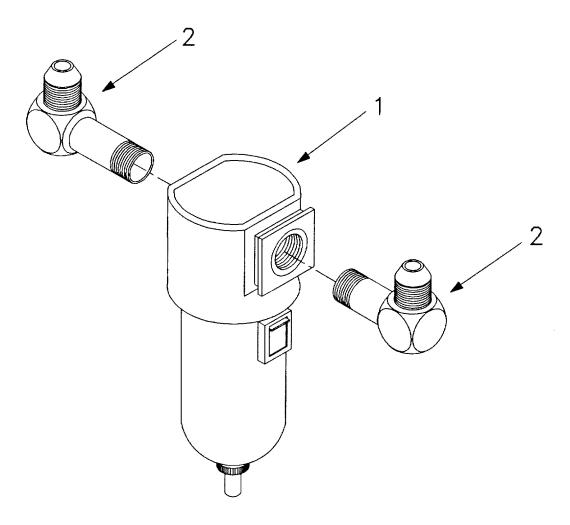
LOW PRESSURE FILTER ASSEMBLY (PA007)
